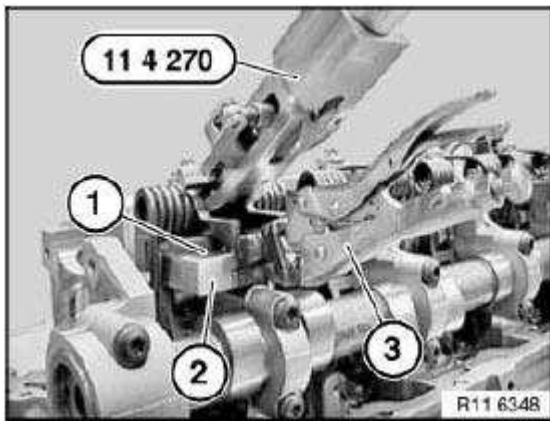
Special Tool (11 4 270) - Gripping Pliers And Guide Block
